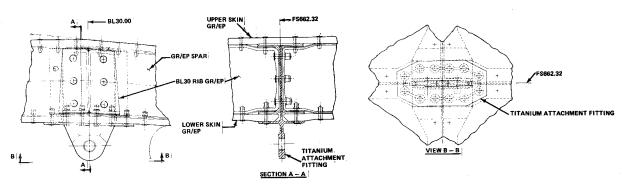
Wing/fuselage attachment - mid spar, wing joint.
